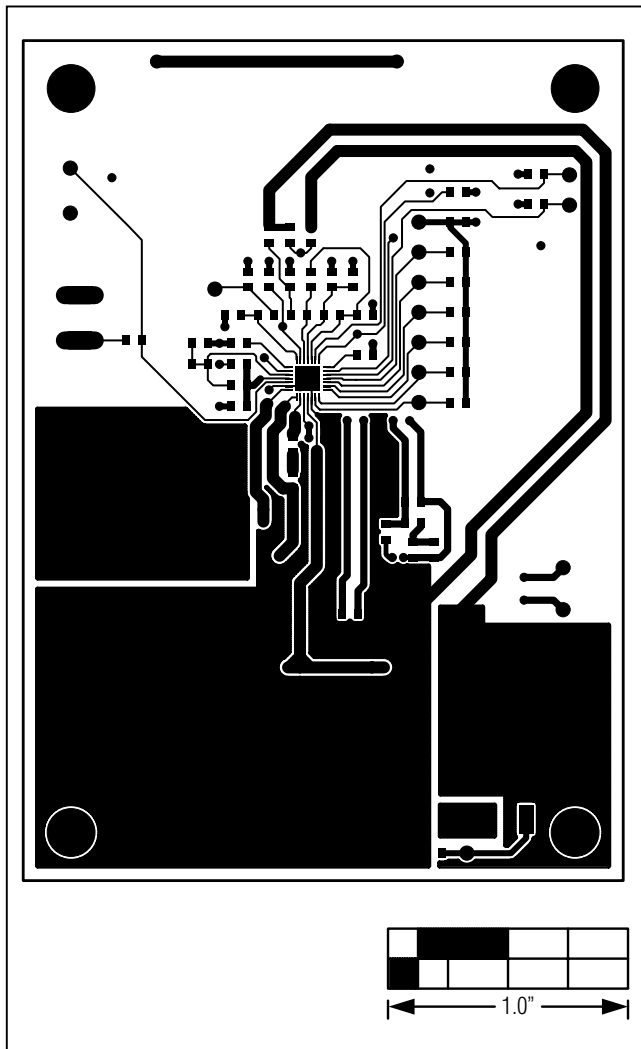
MAX17409 EV Kit PCB Layout—Solder Side
